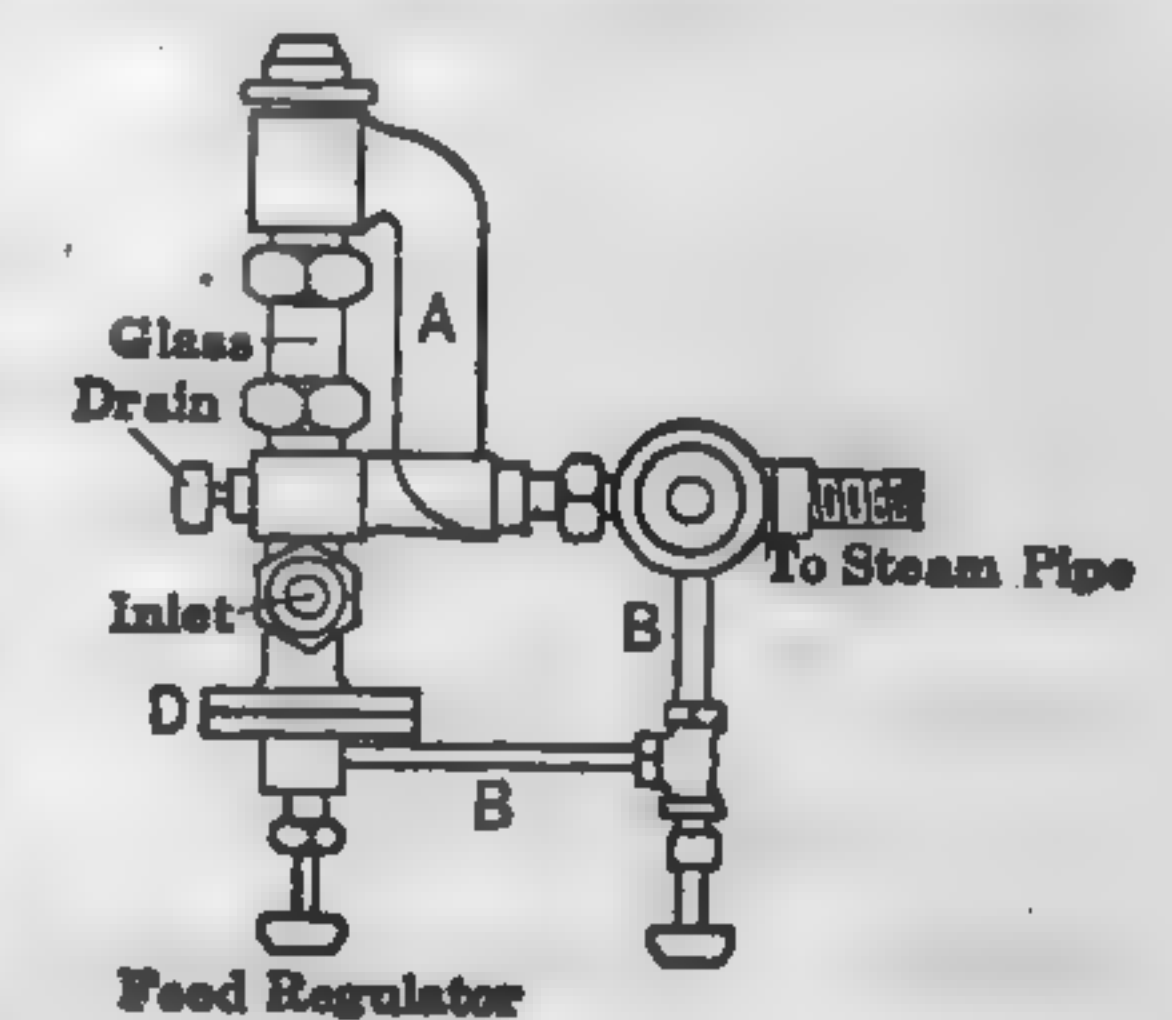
Sight-feed Lubricator (Forced-feed Type).
